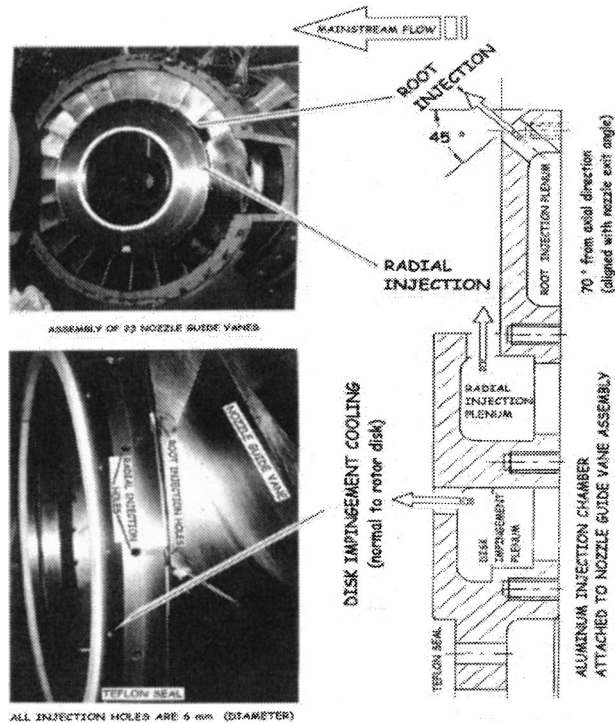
Cooling flow injection chambers for radial cooling, impingement cooling, and root injection
